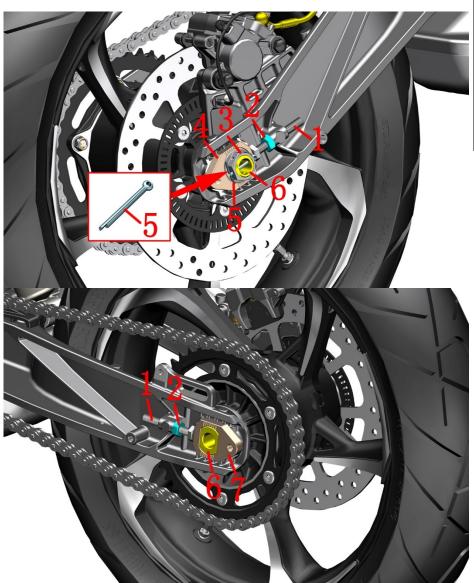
REAR WHELL		Rear wheel component 1	СНК	(0)
